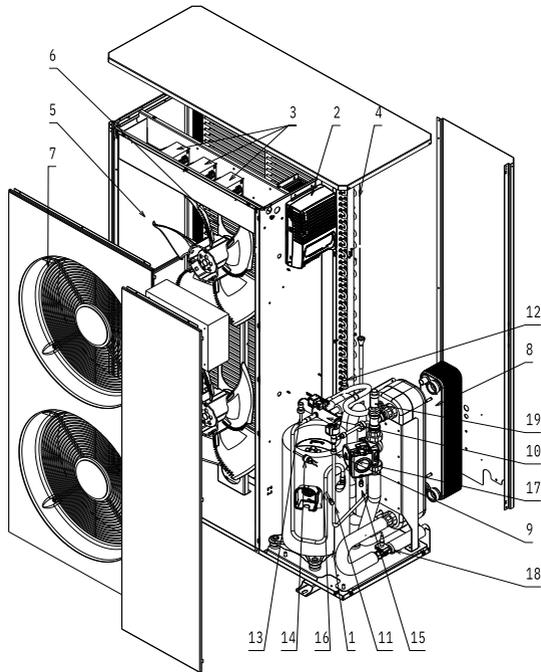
Design of the ZHHS-01-15K-R290-V5 heat pump outdoor unit
